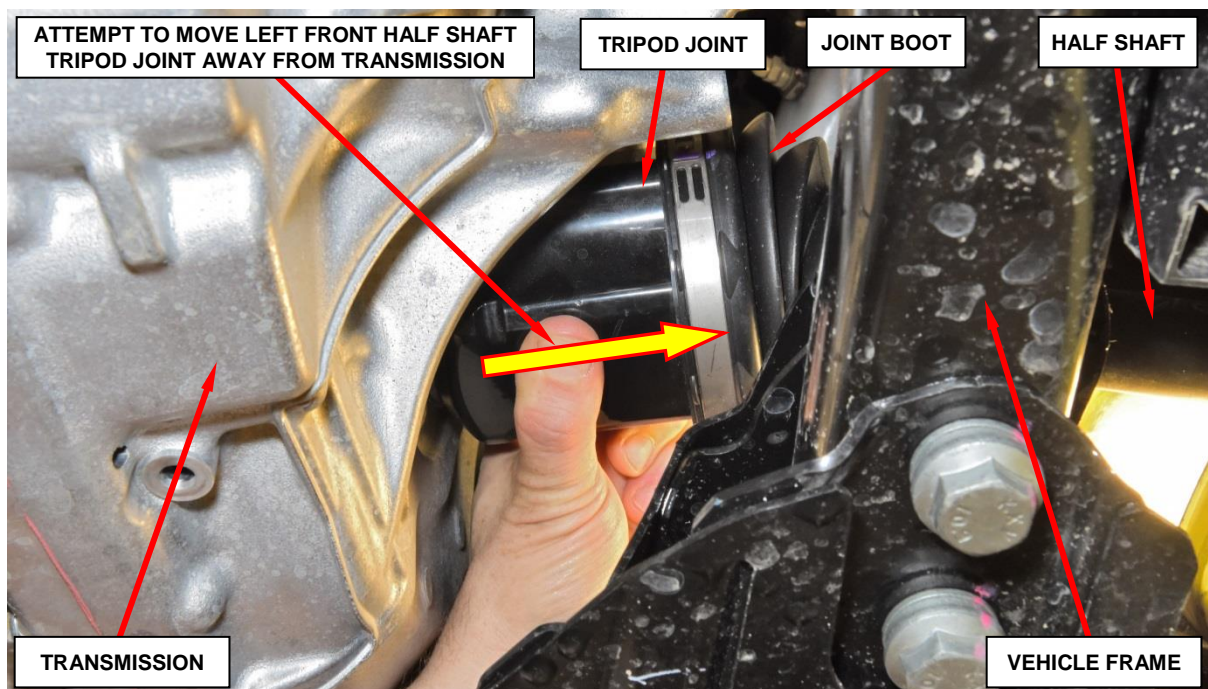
Check Left Front Half Shaft Engagement Into Transmission
